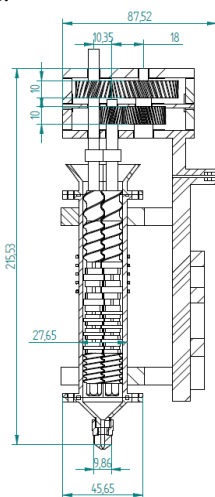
Technical drawing of 3D printer head (case study). Unit: millimeters. [11].
